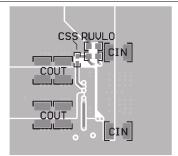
Typical Bottom-Layer Layout (Bottom View)
